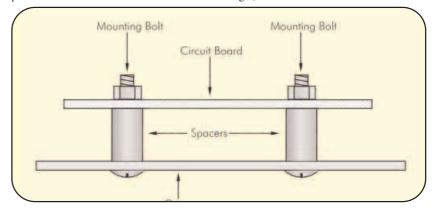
Spacers are used over the mounting bolts so that the circuit board is held clear of the case. Spacers about six millimetres long are usually sufficient
